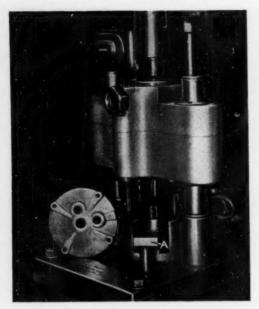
The 2-spindle Head, Here Shown, is Set Up on a Pollard Drilling Machine, and is Used for Boring Inner Gear Plates to a Diameter Tolerance of 0.0008 in.
